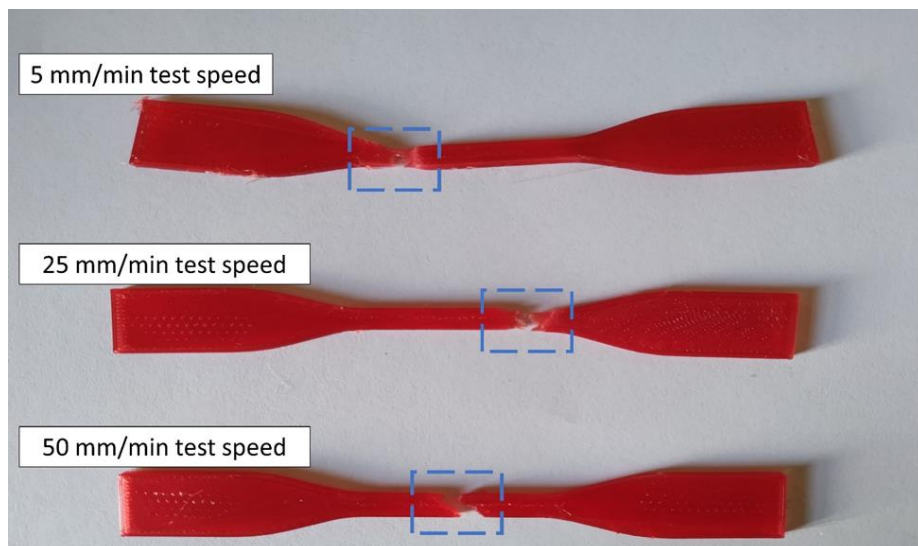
Macroscopic views of the deformed PETG samples having 0.4 mm layer thickness
